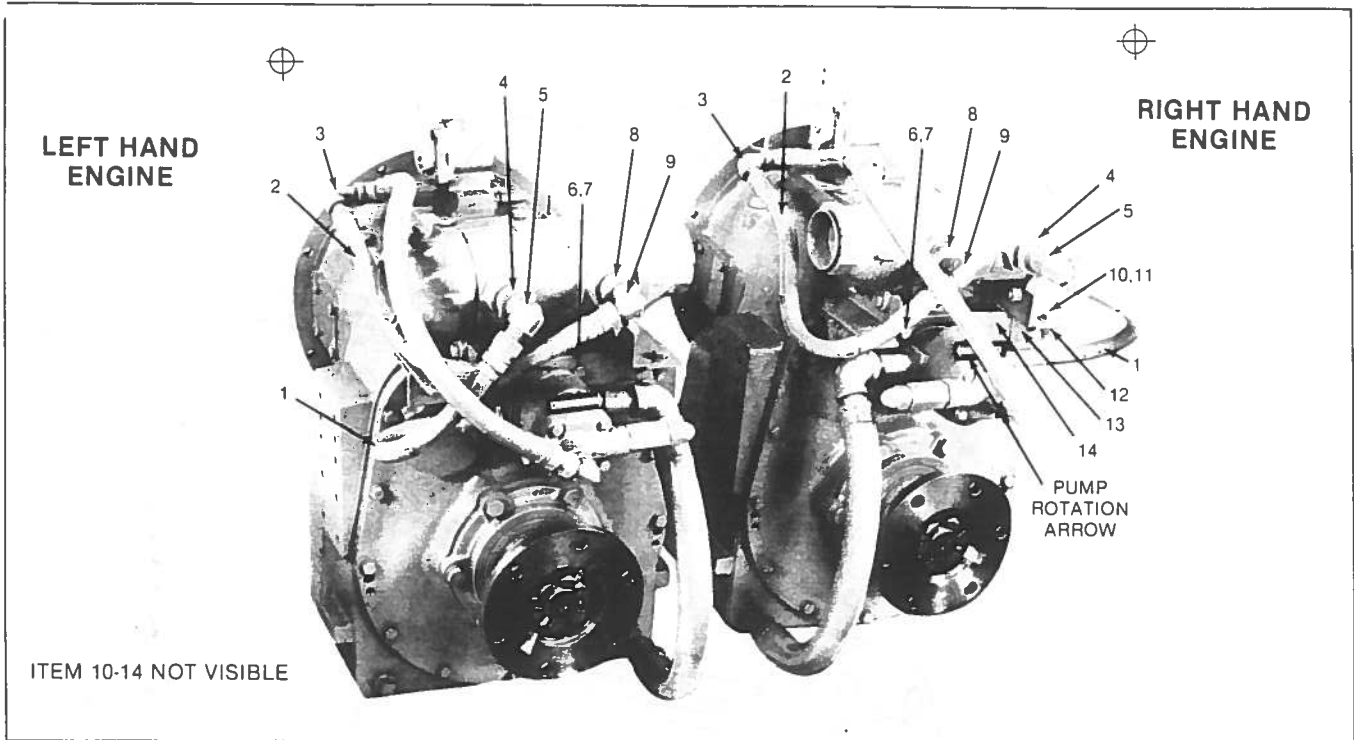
Hose and Bracket Kit No. 1-13909-0000 to be used with Cooler No. 1-07808-5000
